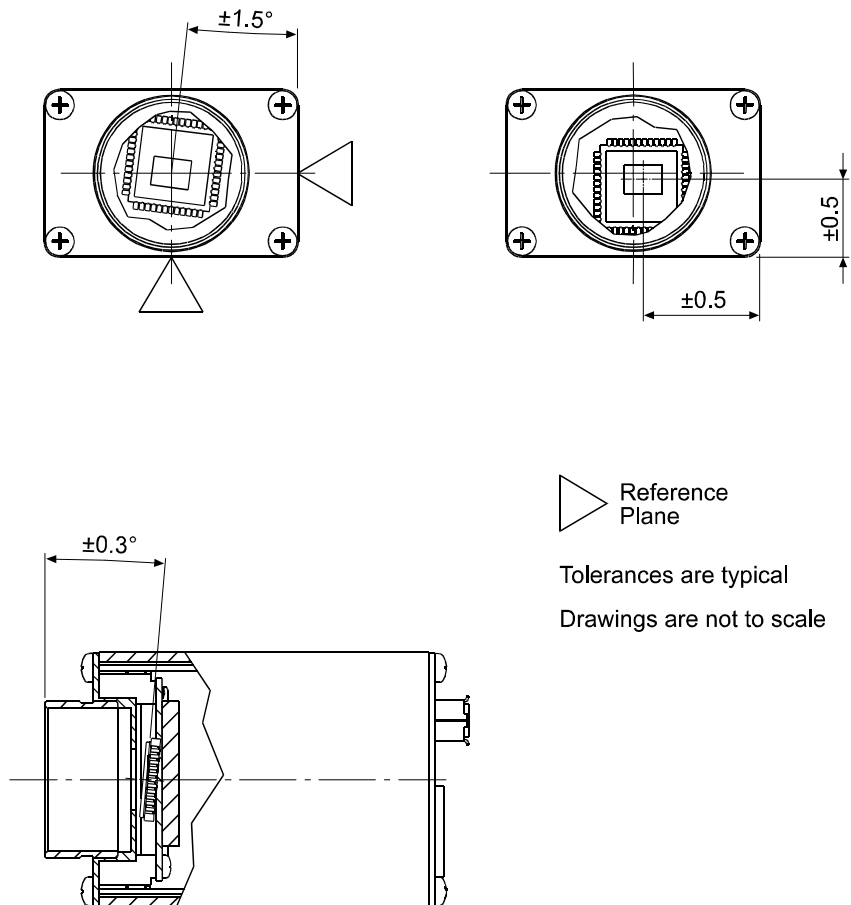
Sensor Positioning Accuracy (in mm or degrees)
